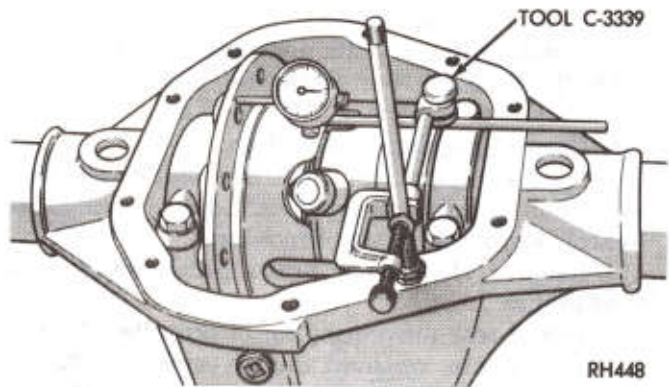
Measuring Differential Case Drive Gear Mounting Flange Face Runout
